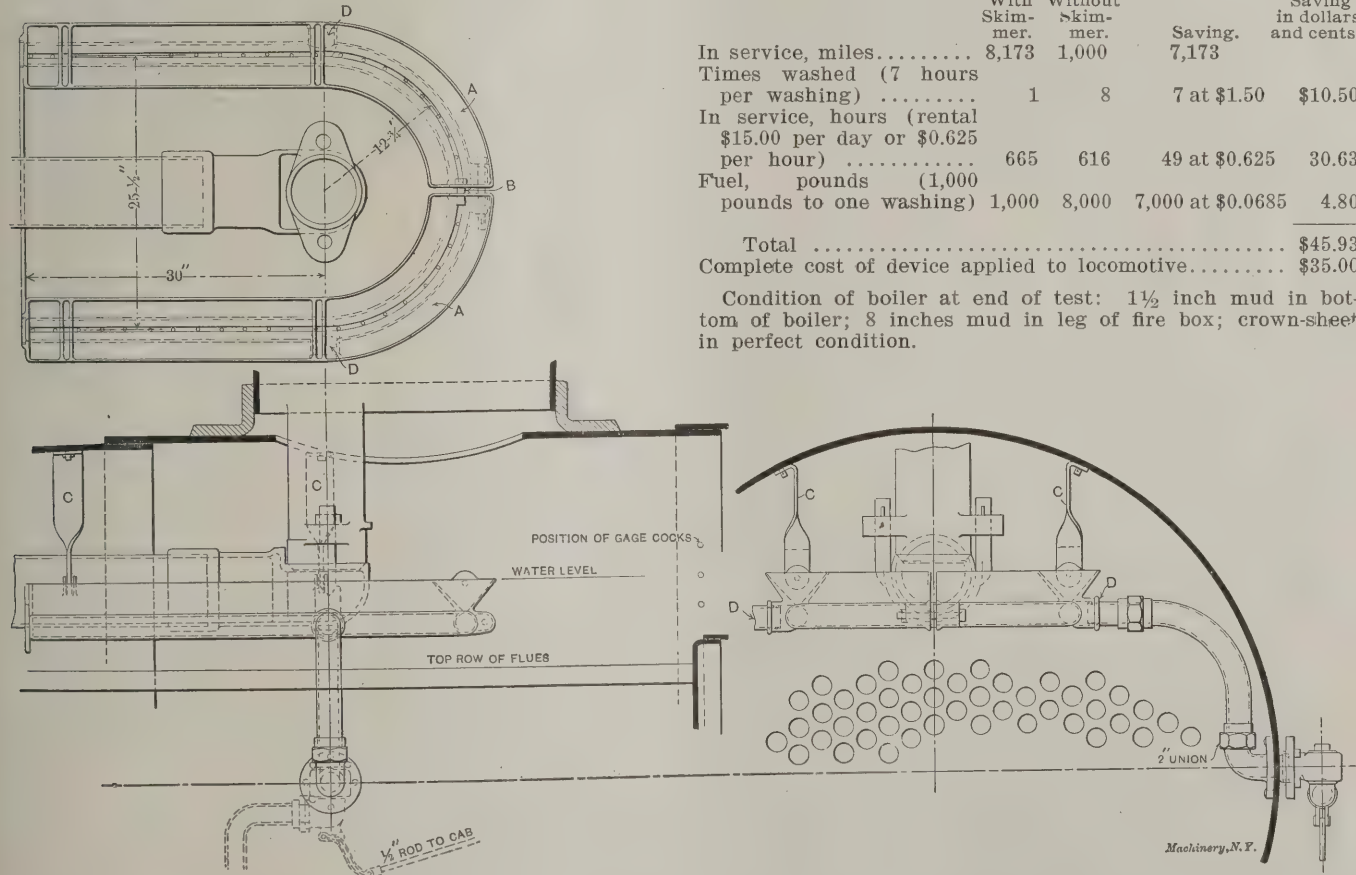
Barnes' Locomotive Boiler Skimmer.
